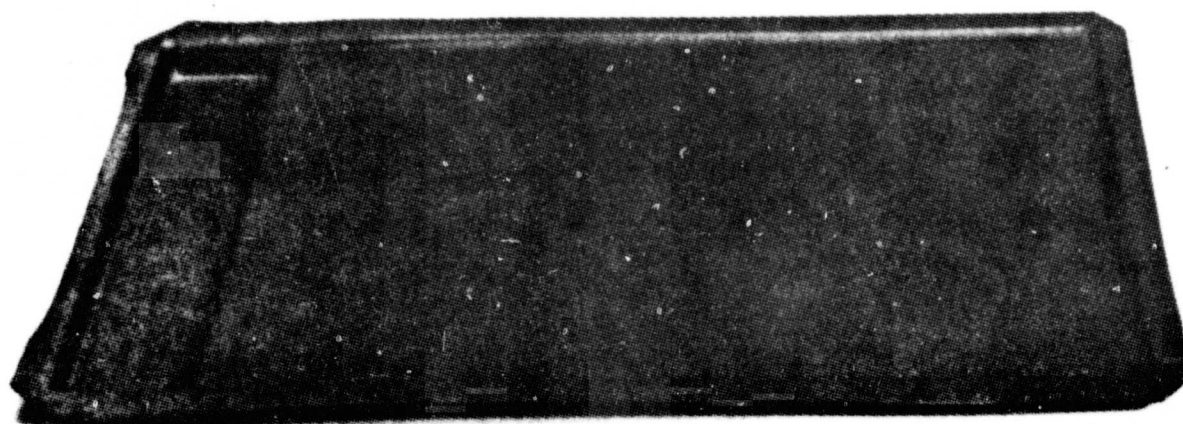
Steel Can Half Made by Pressing a Flat 0.060-Inch Thick Low Carbon Steel Sheet Into a Die Using a Pad of Rubber.
